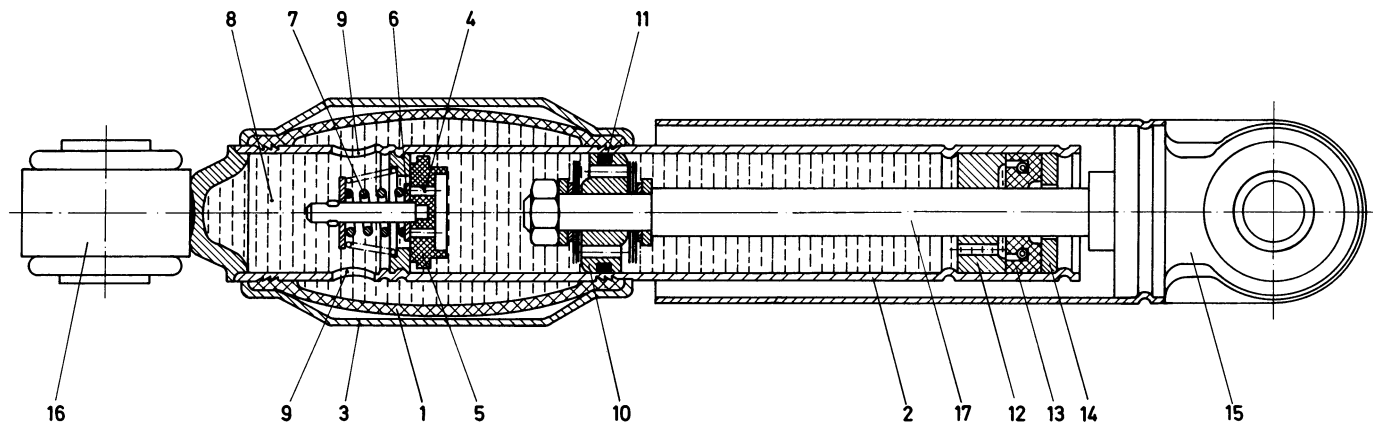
Section through the Stabilus steering damper used on passenger cars and light vans, with its equalization chamber consisting of the elastomer tube 1 and the upper part 8 above the working chamber. The piston 10 is 20 mm and the rod is 8 mm in diameter.
